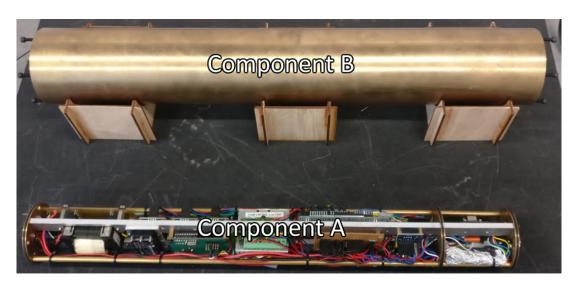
DL20 Assembly, electrical housing (A), pressure chamber (B).
